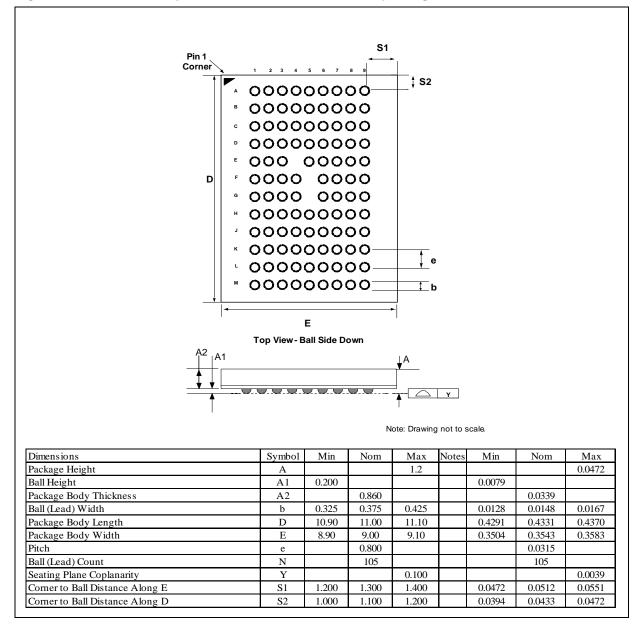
Mechanical Specifications: x16D (105-ball) package (9x11x1.2 mm)
